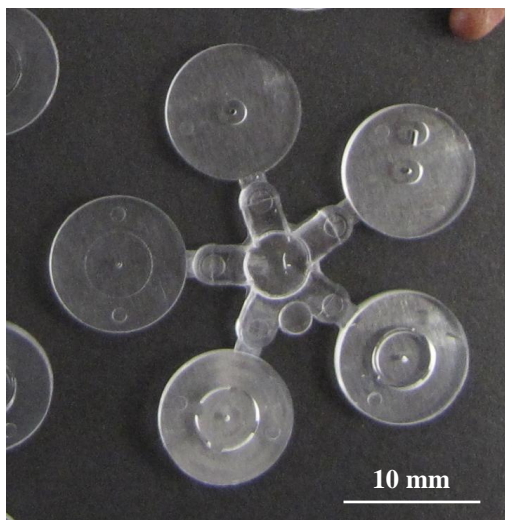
A photograph of a completely filled, five-part plastic component produced under compromise conditions
